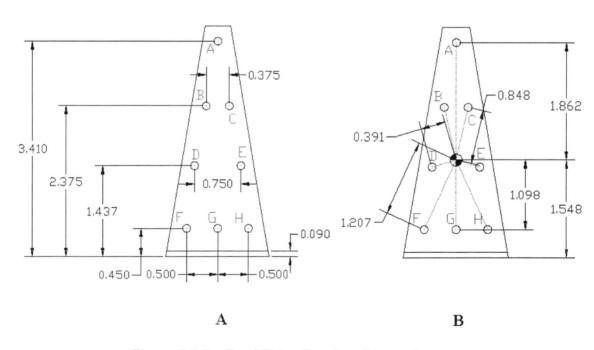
Roof Fitting Bracket, Dimensions
